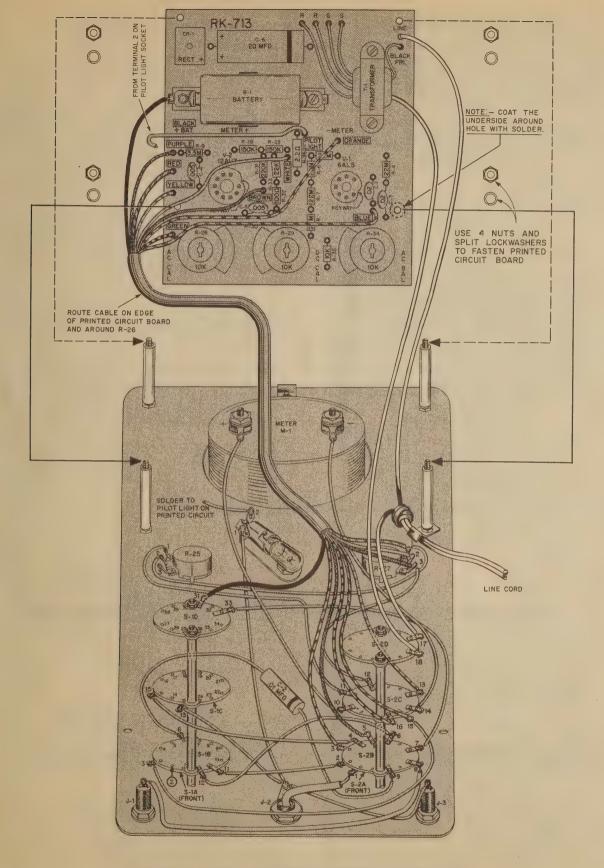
HOW TO MOUNT THE PRINTED CIRCUIT BOARD
